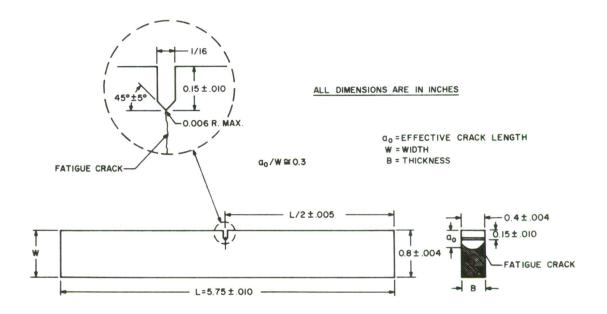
Four Point Loading Slow Bend Specimen Configuration
